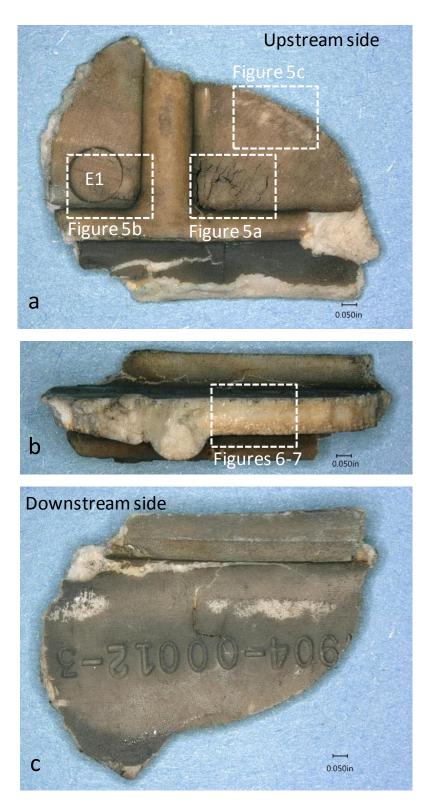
Closer views of an individual piece of flapper 1. See Figure 2 for the location of this piece.
